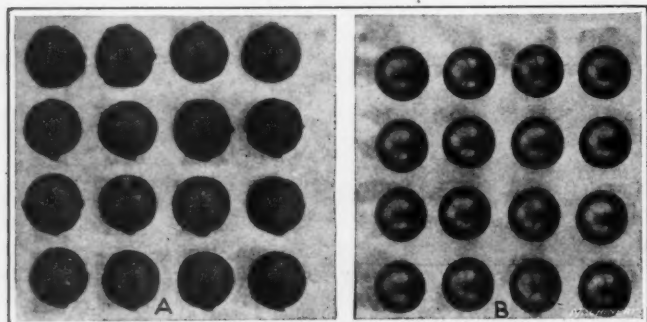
(A) Cold-header Ball Blanks, showing Splits running from Pole to Pole; (B) Finished Balls produced from Blanks split during Cold-heading Operation
